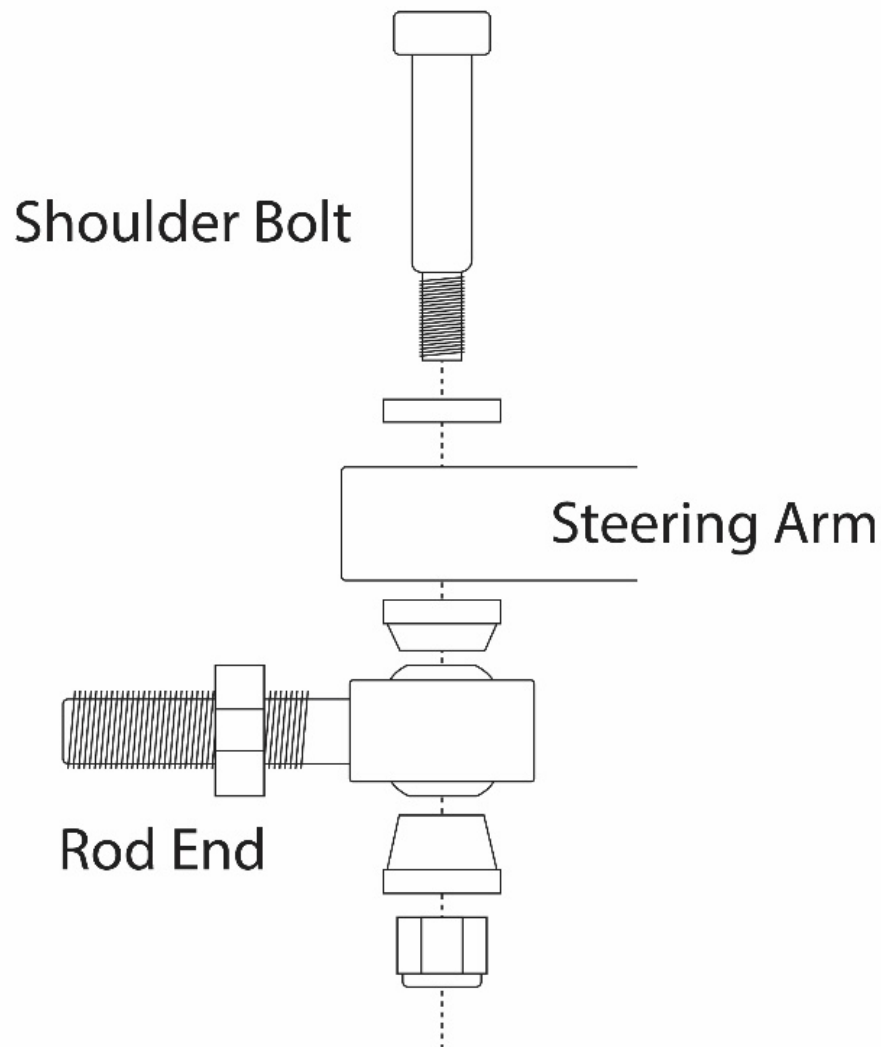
Installing the shoulder bolts, steering arms, and rod ends
